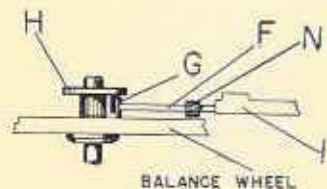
Contact unit must be level and centered between roller plate H and balance wheel. Make sure that it remains perfectly horizontal.
